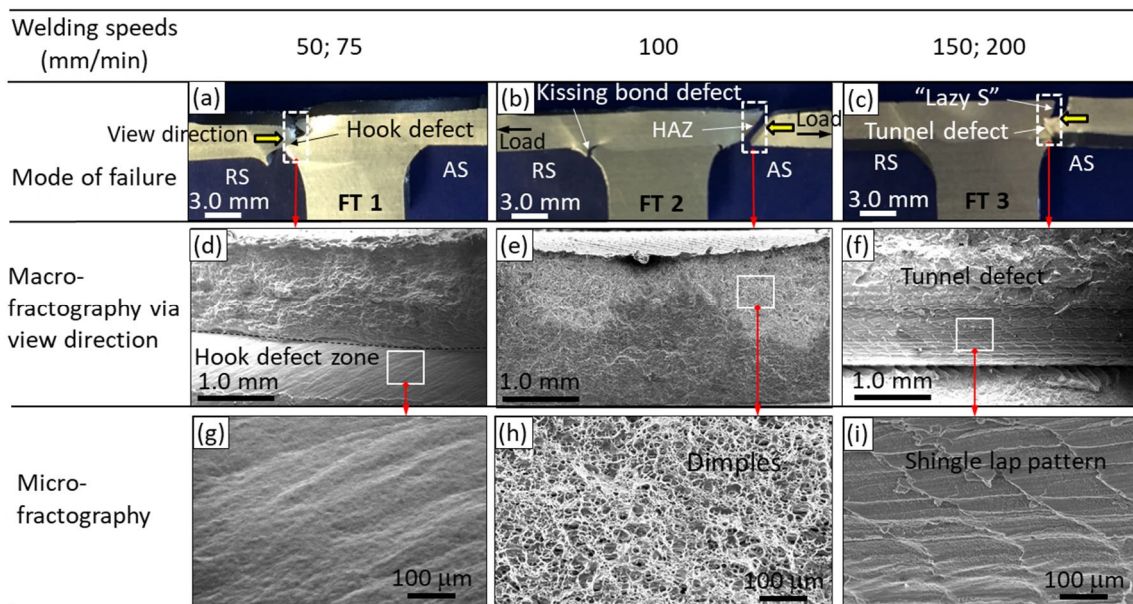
Failure behavior of specimens under skin tensile test in T-lap joints. (a-c) fracture location and (d-i) corresponding fractographies.
